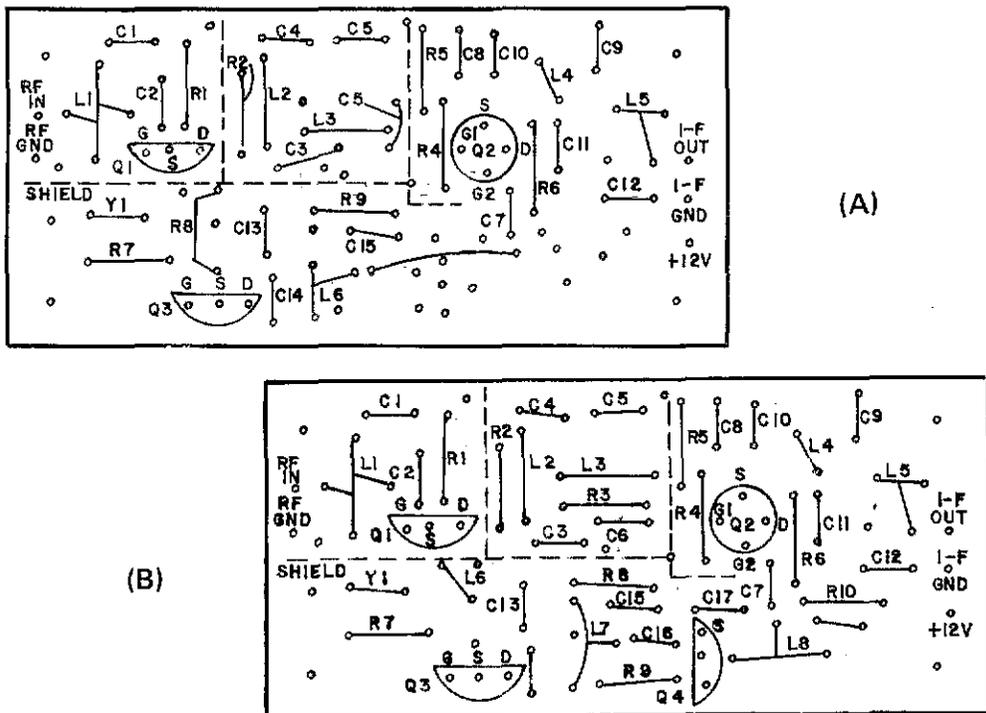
Parts-placement guide for the six-meter converter, A, and the two-meter converter, B. View is from the component side of the board. Dashed lines show the location of shields that are soldered to short pieces of wire which project through holes in the pc board. The shields may be fabricated from sheet brass or copper, or scraps of copper-clad board material.
